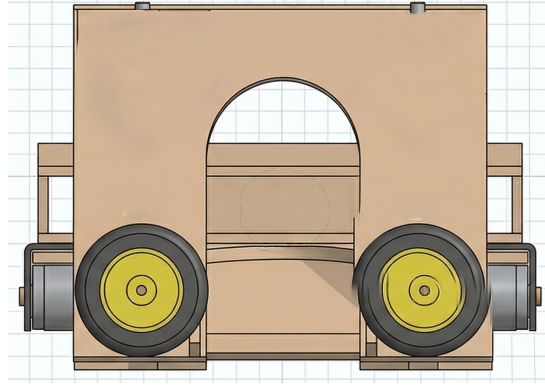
A detailed front-on view of the Courtsweeper dual-roller intake mechanism.
